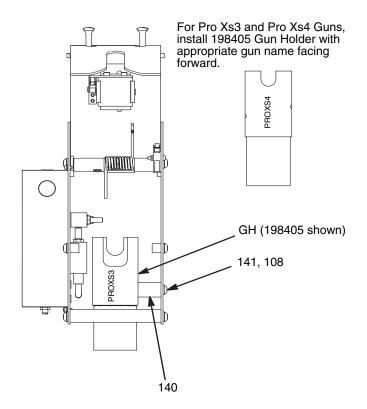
Gun Holder Installation (Pro Xs3 and Xs4 Guns)
